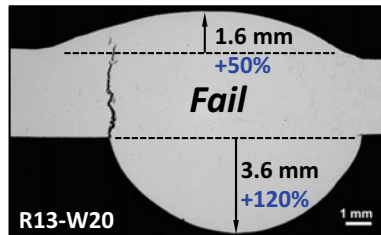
Example of excessive reinforcement leading to a stress concentration at the toe of the weld
